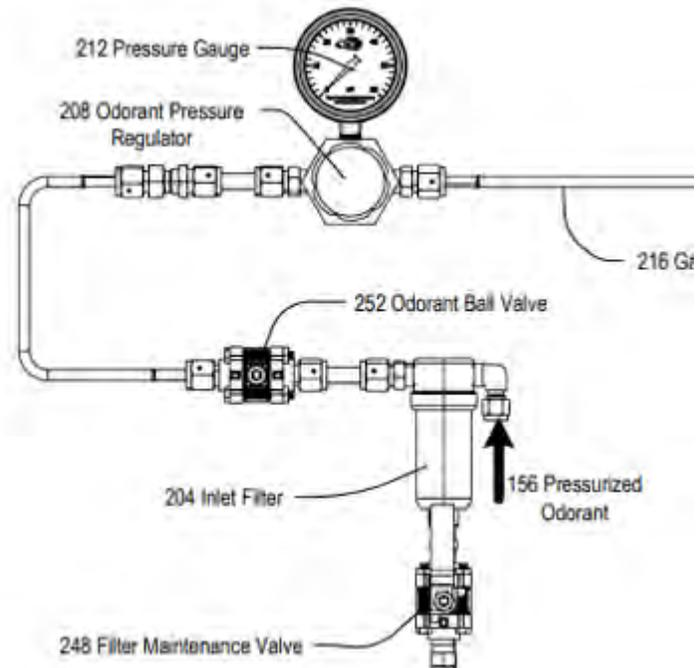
Shows the odorant supply ball valve and pressure regulator.
